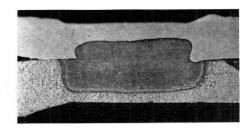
Spot weld between dissimilar materials (S.84 and S.110).
